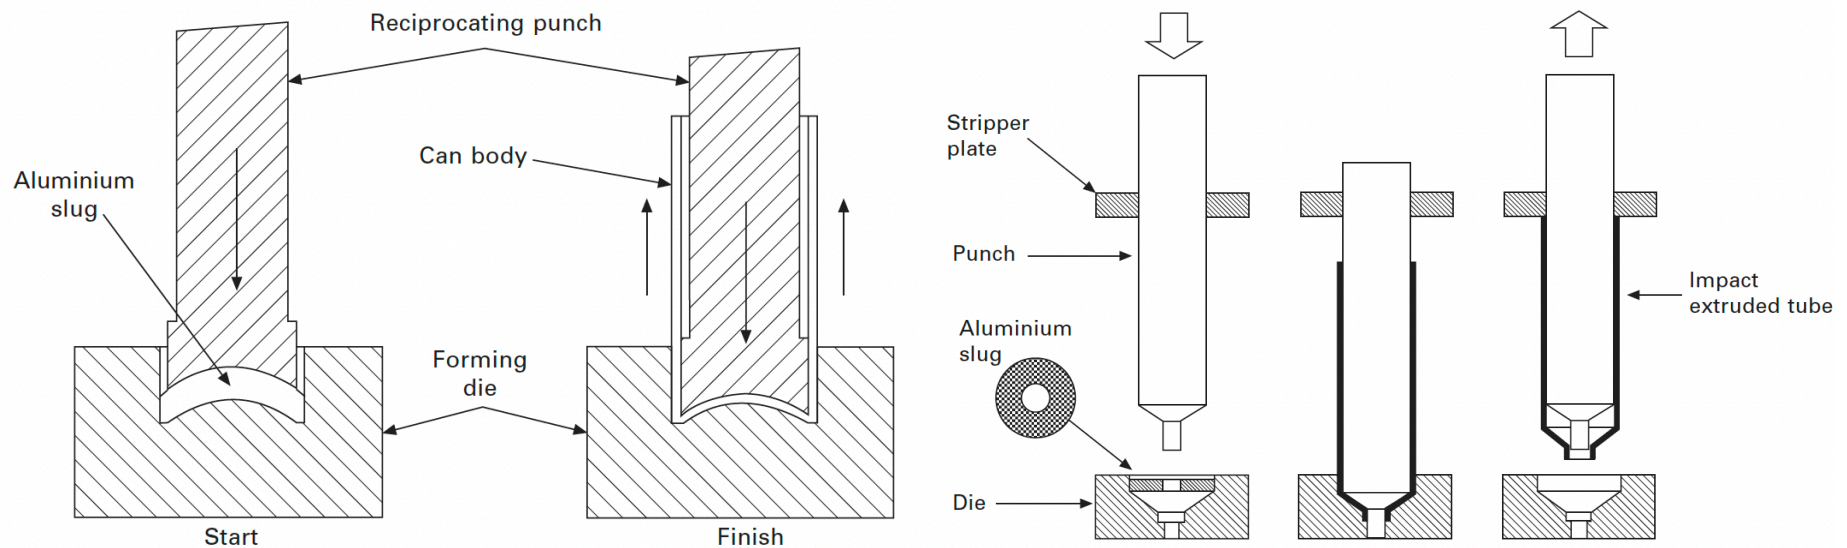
Impact extrusion process of aluminum bottles(left) and collapsible tubes (right).
